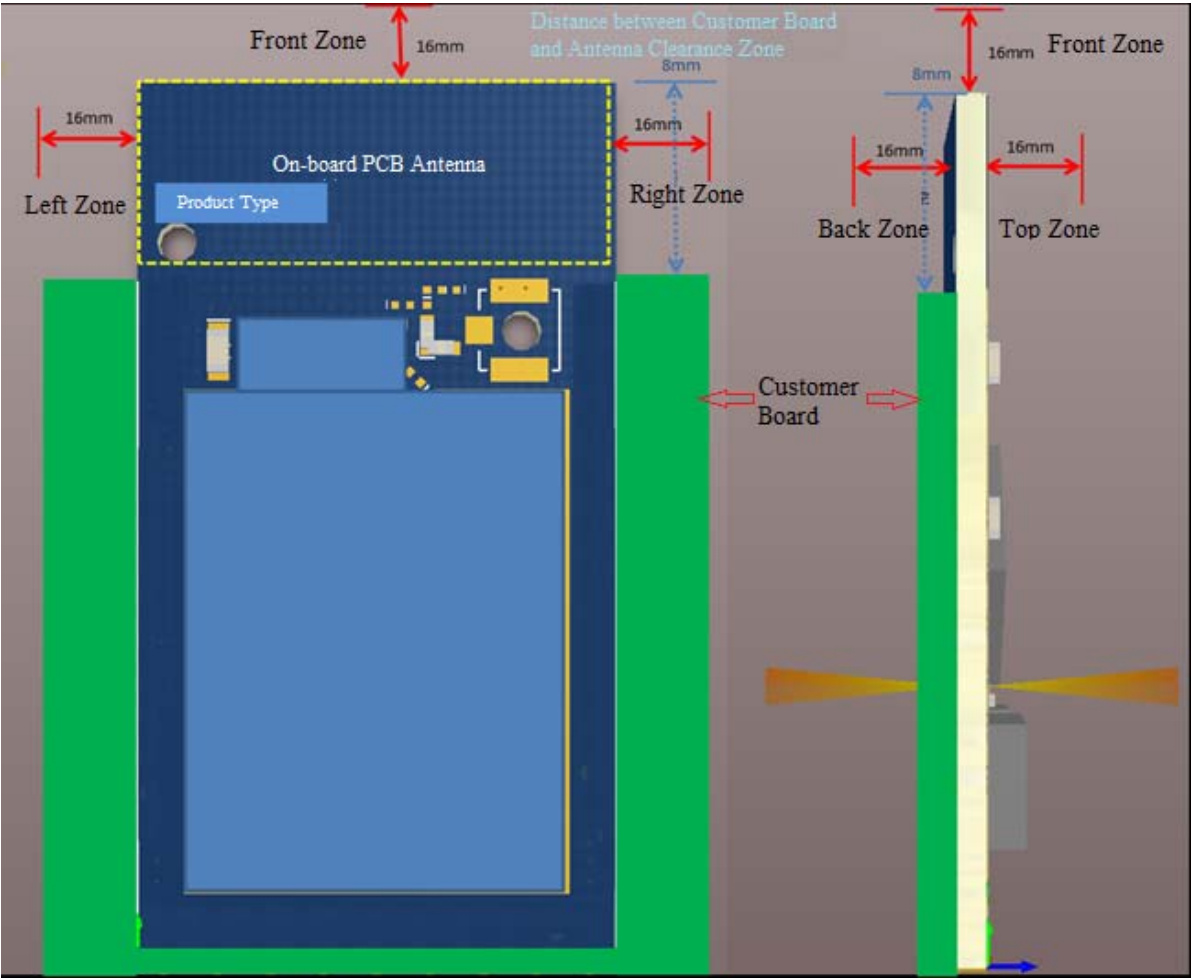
Minimum Clearance Zone of PCB Antenna (Unit: mm)
